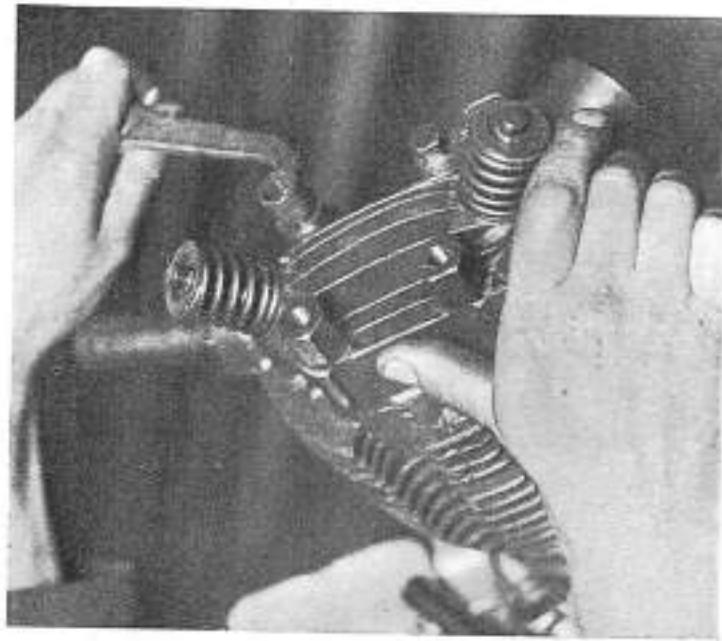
REMOVING CYLINDER-HEAD BOLTS WITH SPECIAL ANGLE SPANNER
